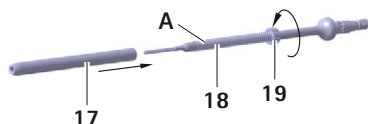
Mounting the S<sup>4</sup>C tapper (Tap)
